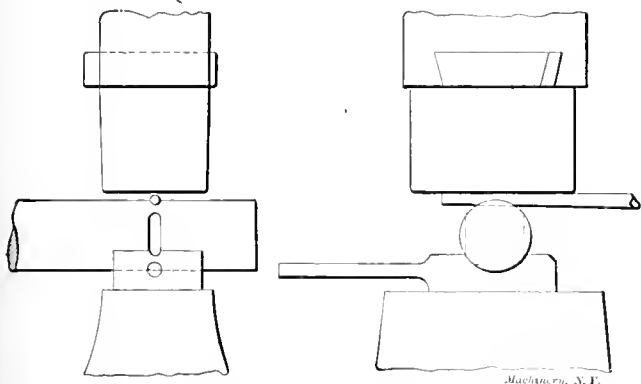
First Operation in reducing the Diameter of a Tool Steel Bar under the Steam Hammer.
